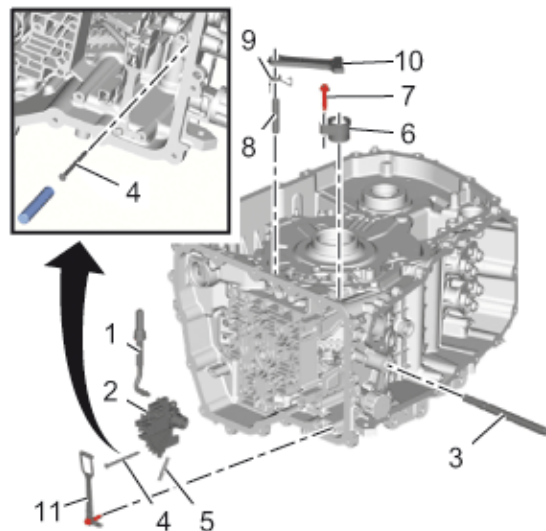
Manual Shift Detent Lever Shaft And Pin
